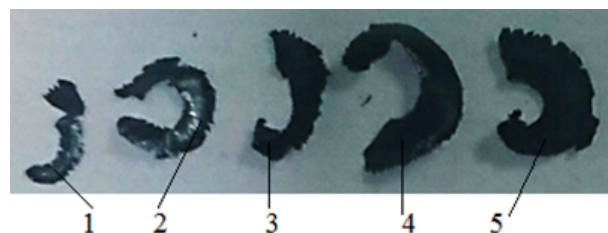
shows the surface of the processed steel 30KhGSA and types of chips obtained when different tool feeds.
